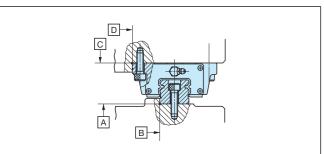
Reference mounting surfaces and general mounting structure of Linear Way and Linear Roller Way
